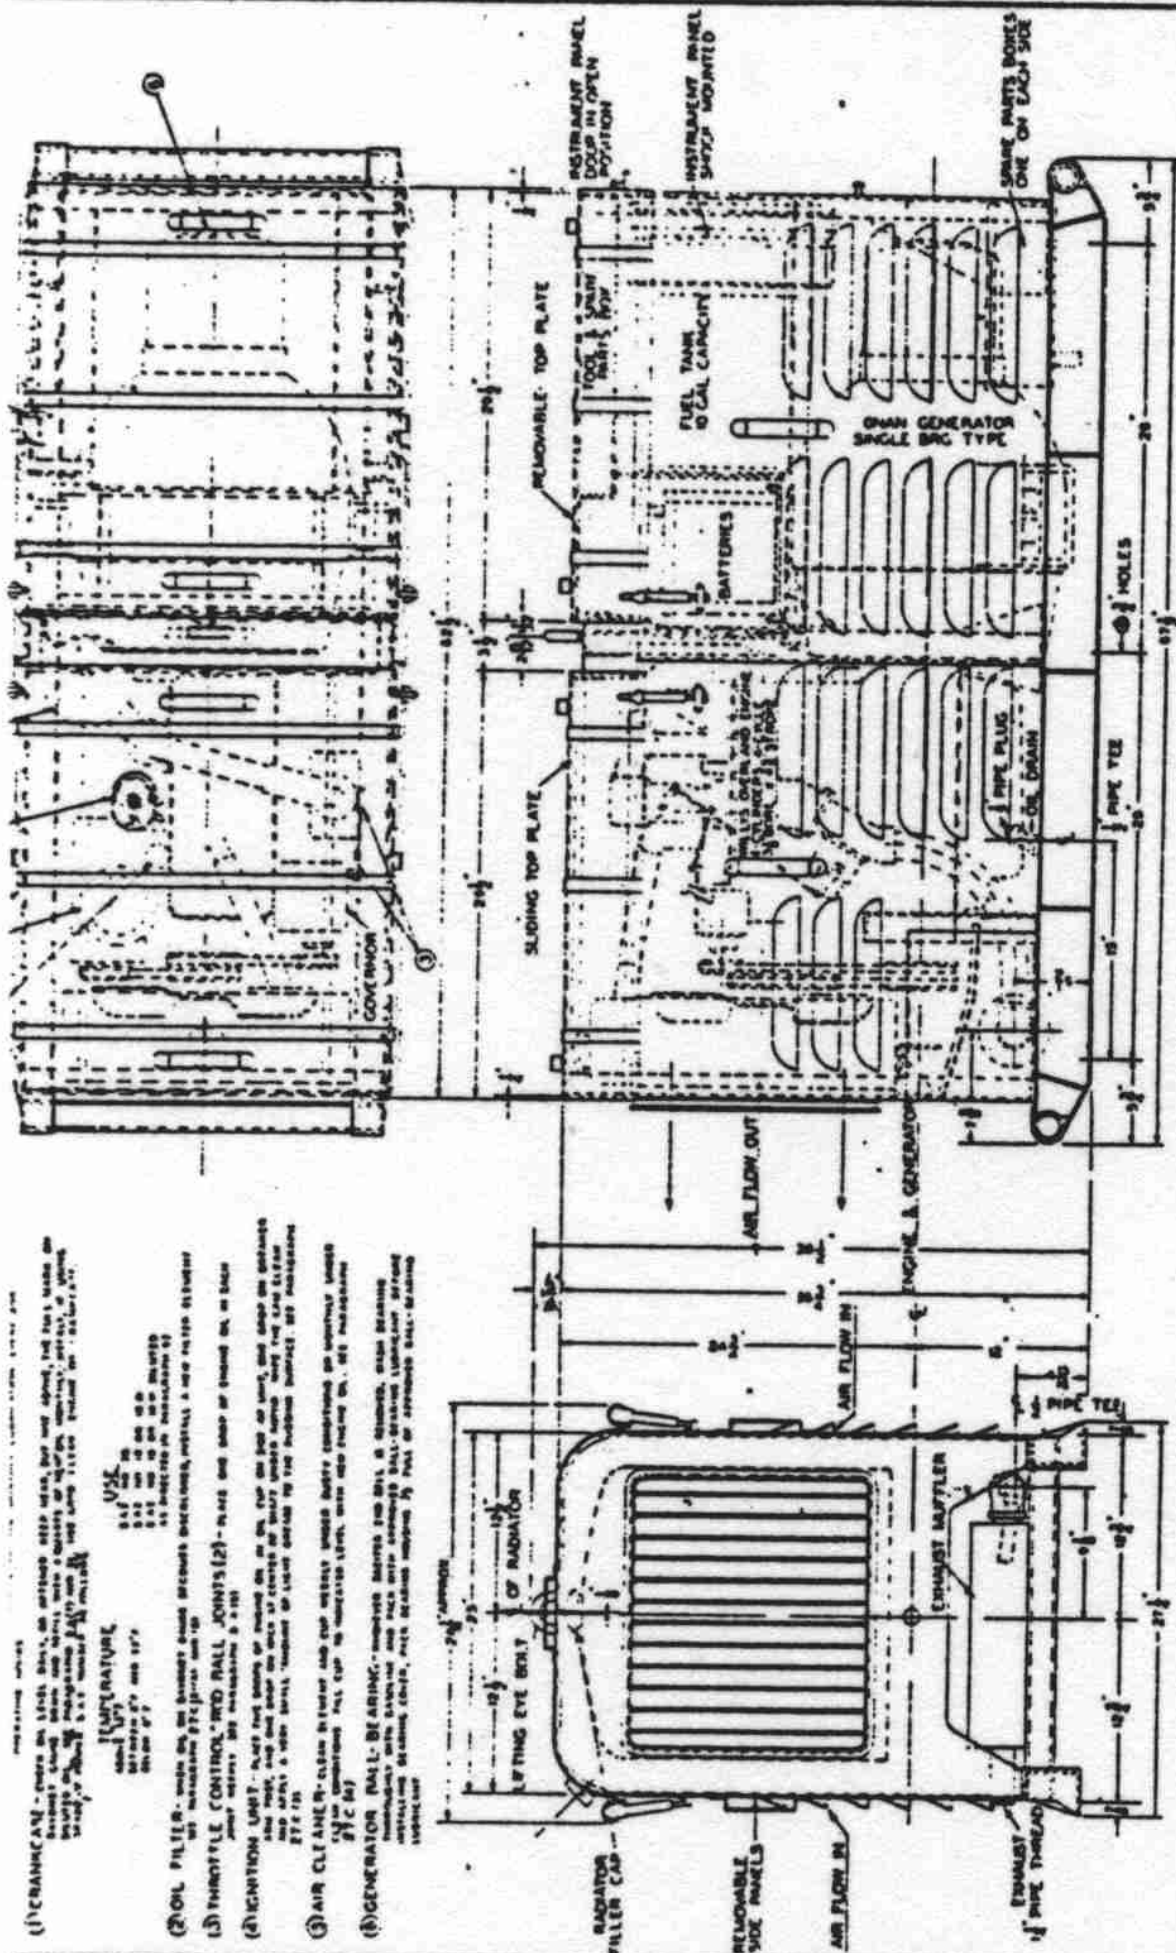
LUBRICATION CHART AND ASSEMBLY OUTLINE
